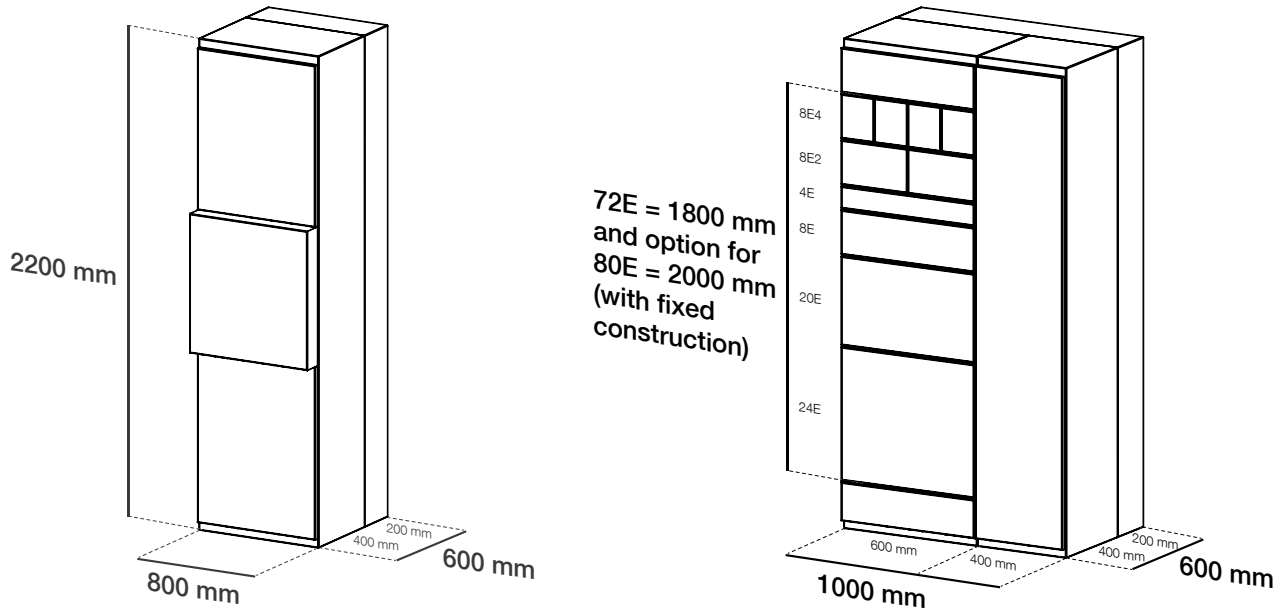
Incoming / outgoing circuit breaker section (left), outgoing section (right)
